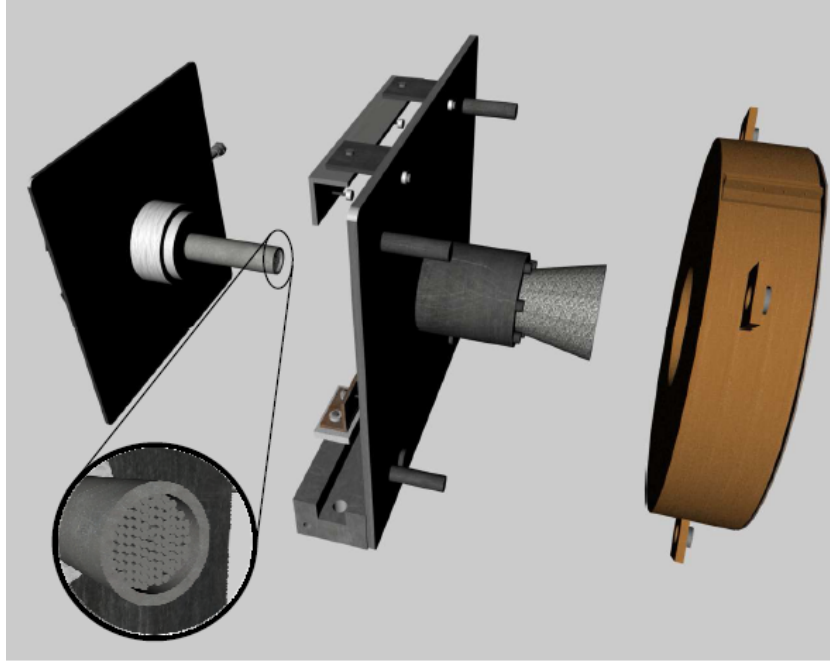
Exploded View of the LiLFA with a close-up on the cathode's multi-channel end.
